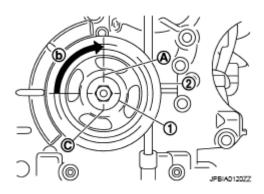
Tightening Crankshaft Pulley Bolt Courtesy of NISSAN MOTOR CO., U.S.A.
